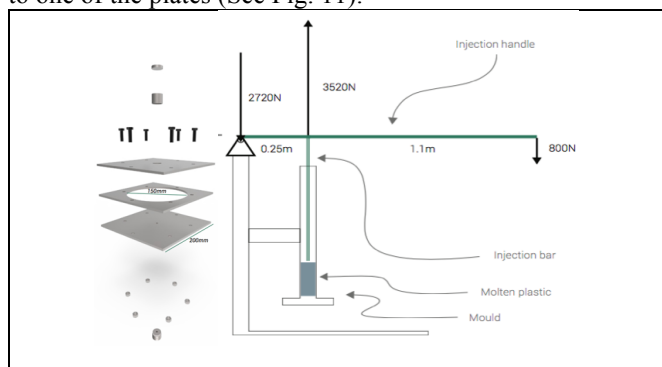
Details of developed mould (left) and the Precious Plastic Injection machine (right).
